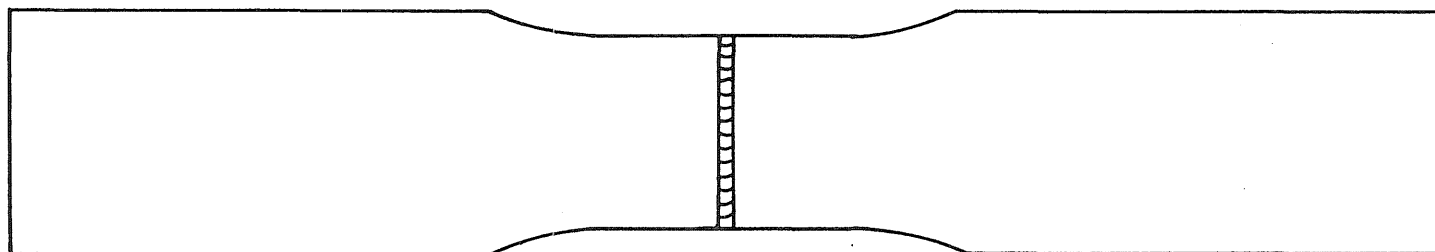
RESULTS OF FATIGUE TESTS OF TRANSVERSE BUTT-WELDED JOINTS
